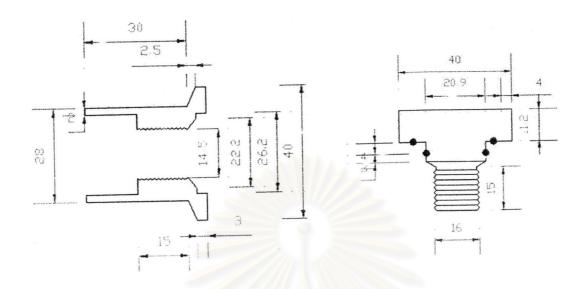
NW 25 tube and NW 25 plug (in mm unit)
